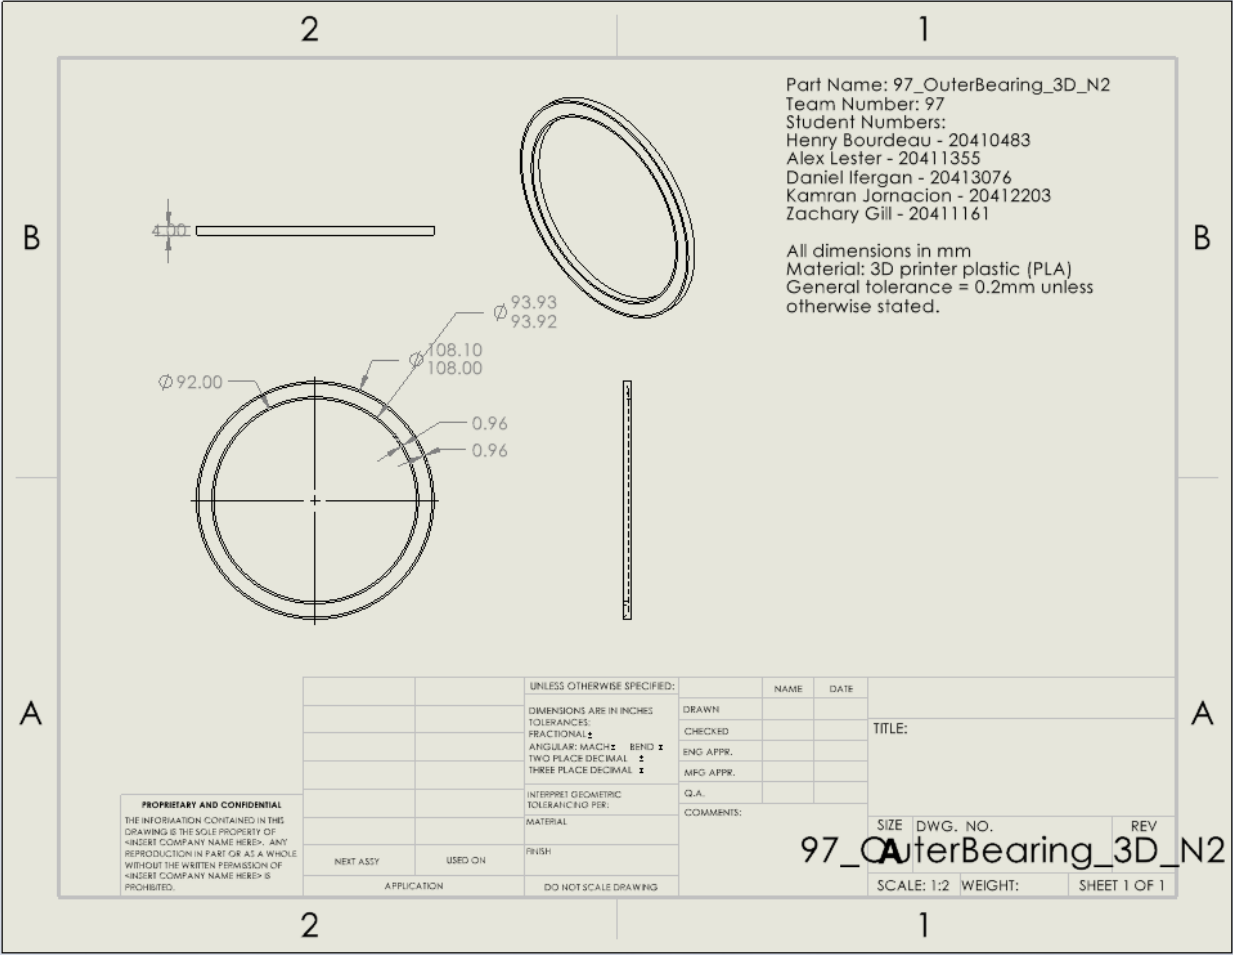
Working drawing for 97\_OuterBearing\_3D\_N2
